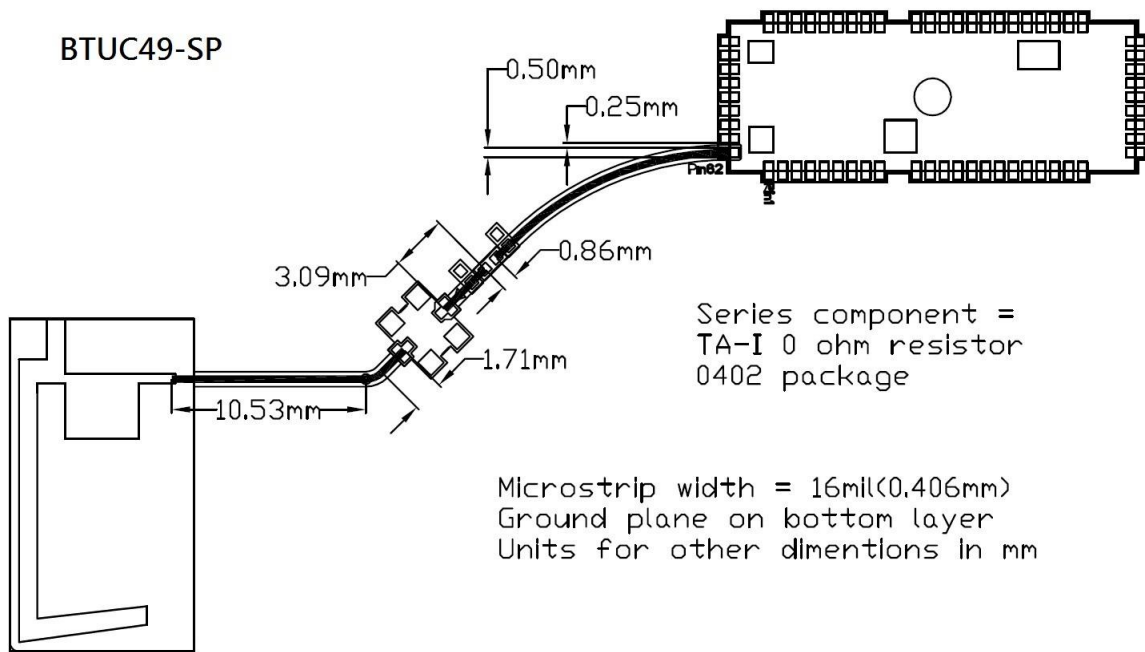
Trace Dimensions and RF Matching Component Placement for BTUC49-SP
